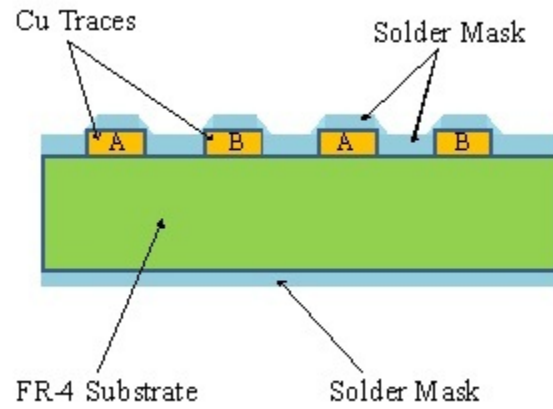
A cross-sectional drawing of interdigitated electrodes realized in the Cu foil on one side of a PCB
